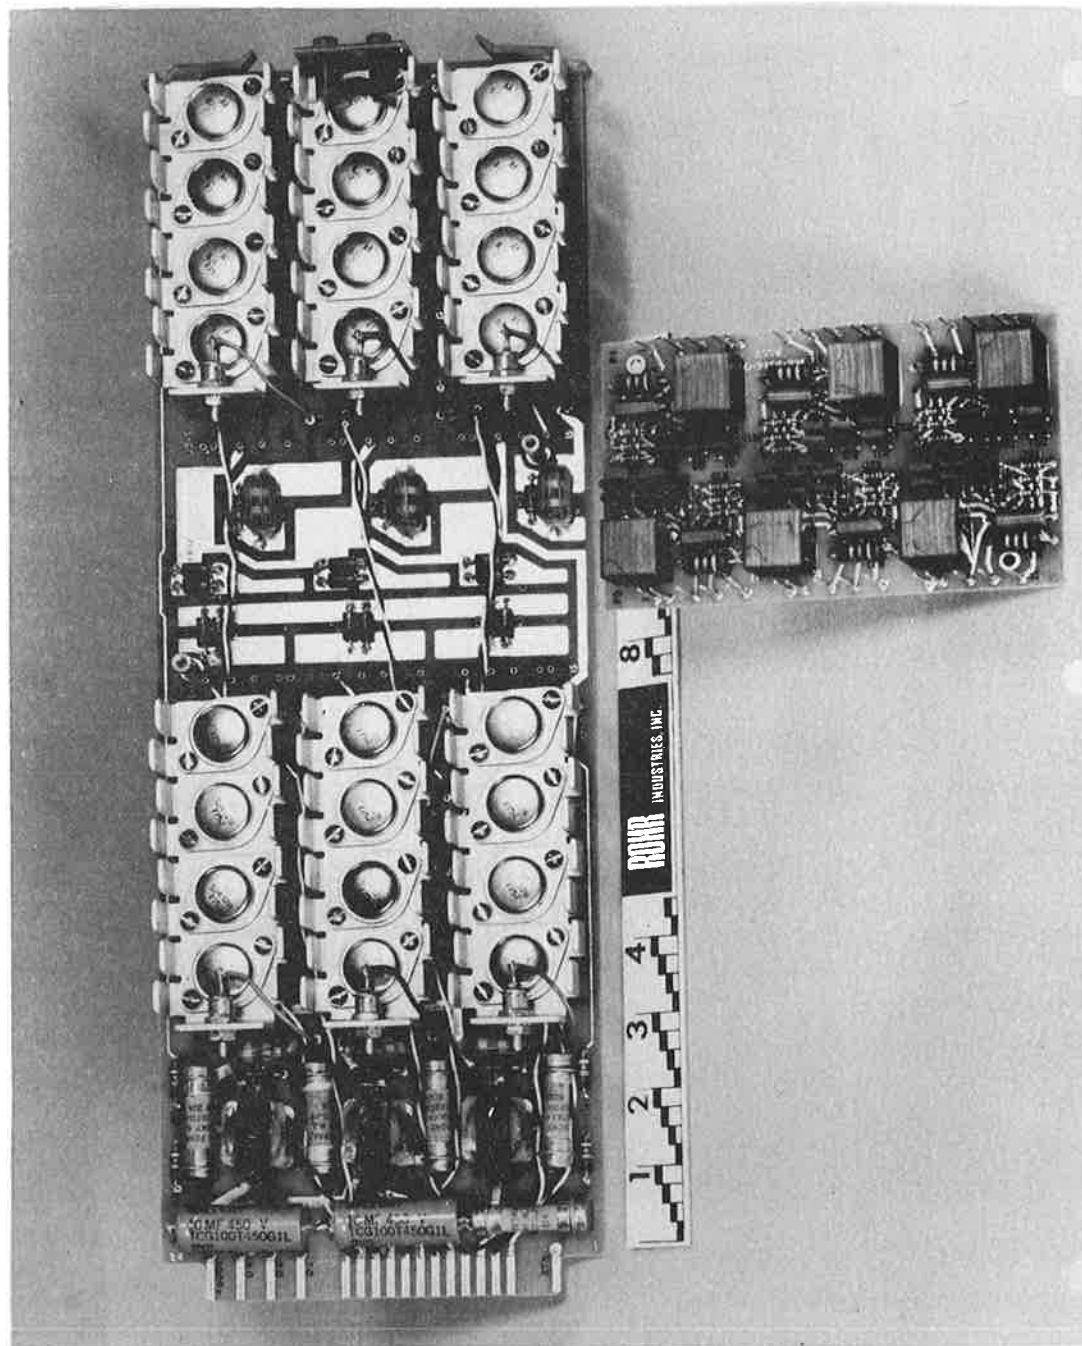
POWER MODULE ASSEMBLY WITH PIGGY BACK MODULE
